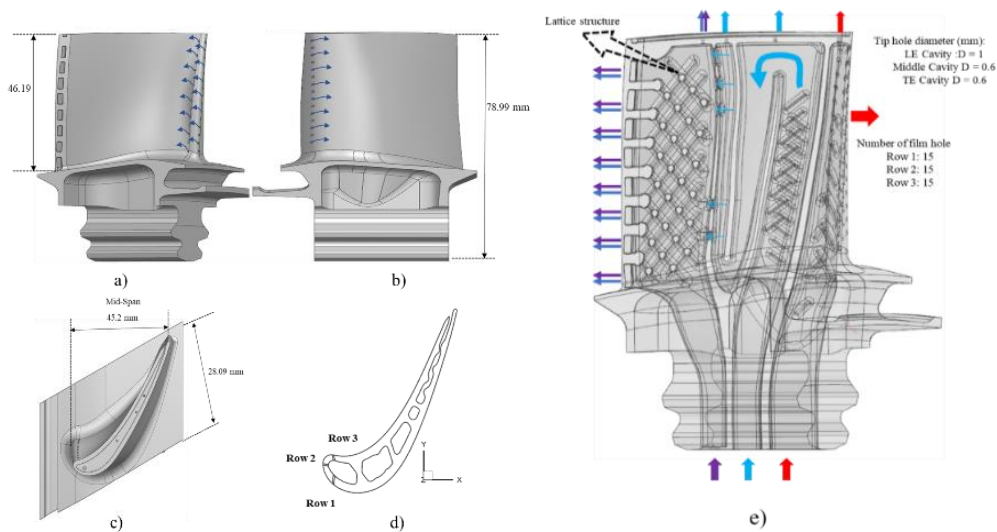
Rotor blade pressure side a); Rotor blade suction blade b); Rotor blade tip and hub c); Mid-span section and film hole position d); Rotor blade inner structure e)
